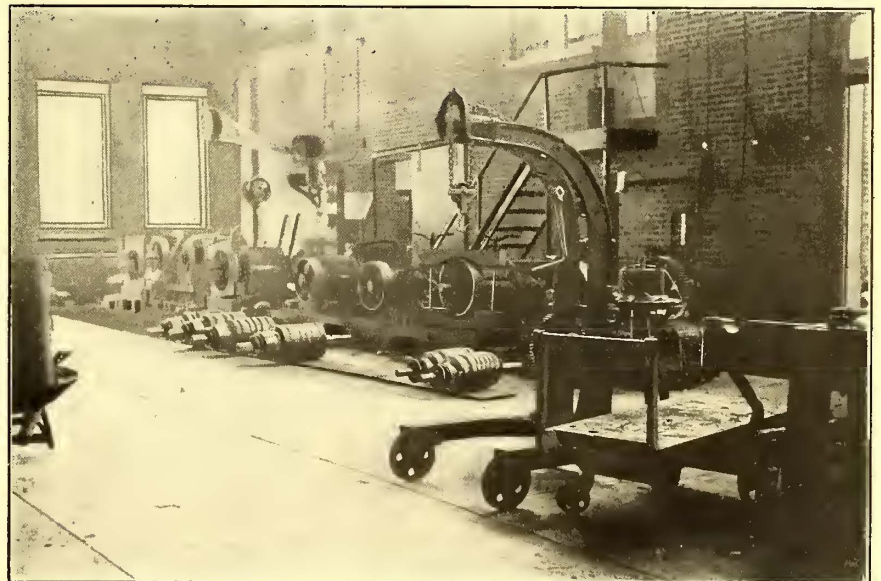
MOTOR-TESTING RACKS AND ARMATURE DERRICK TRUCK
